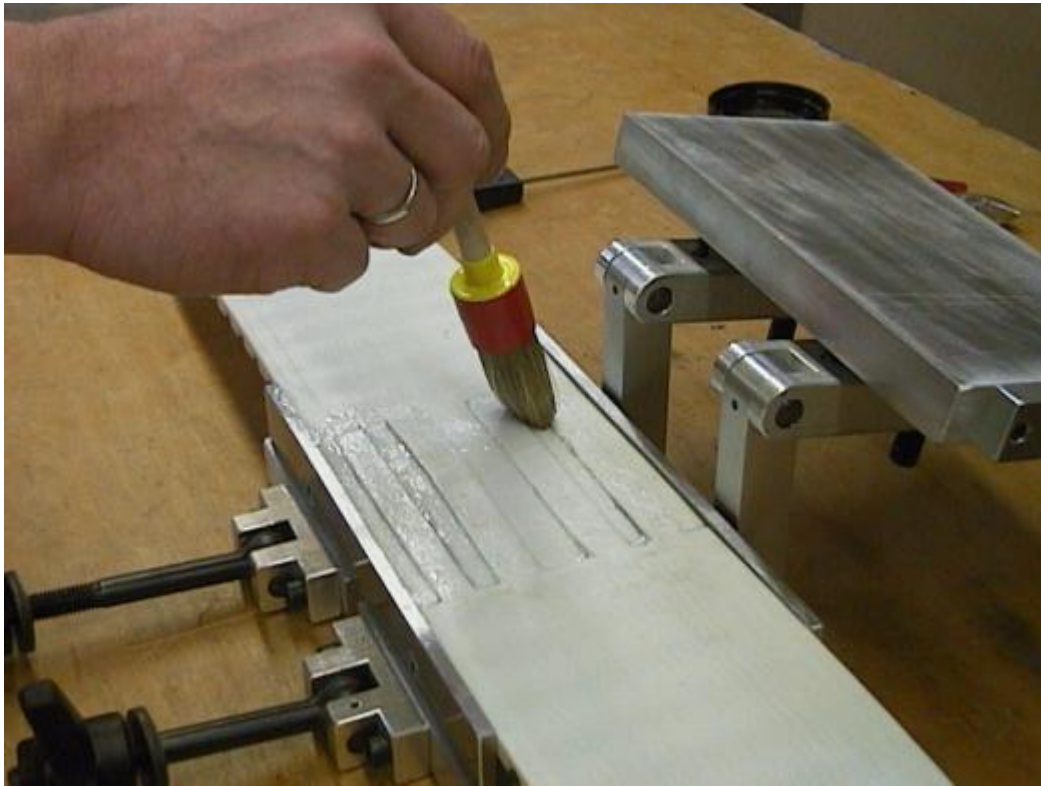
Brush additional bonding agent onto the weld area.
